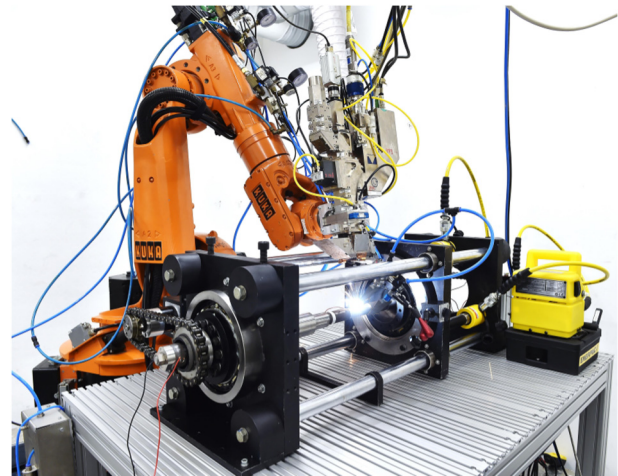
Experimental setup for the ultrasound assisted laser beam welding.
